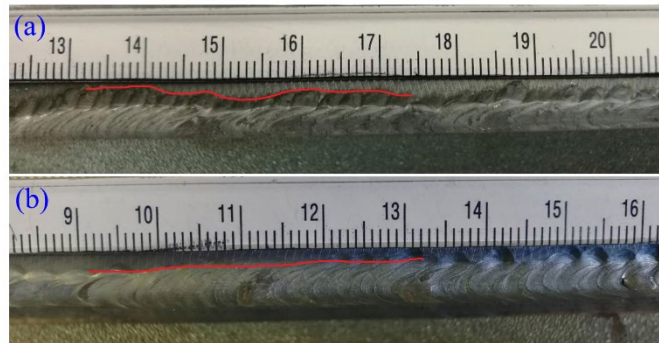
Solid Red Line Draws the Outline of Weld Bead (a) from Manual Welding (b) from Human-robot Collaborative Welding.
